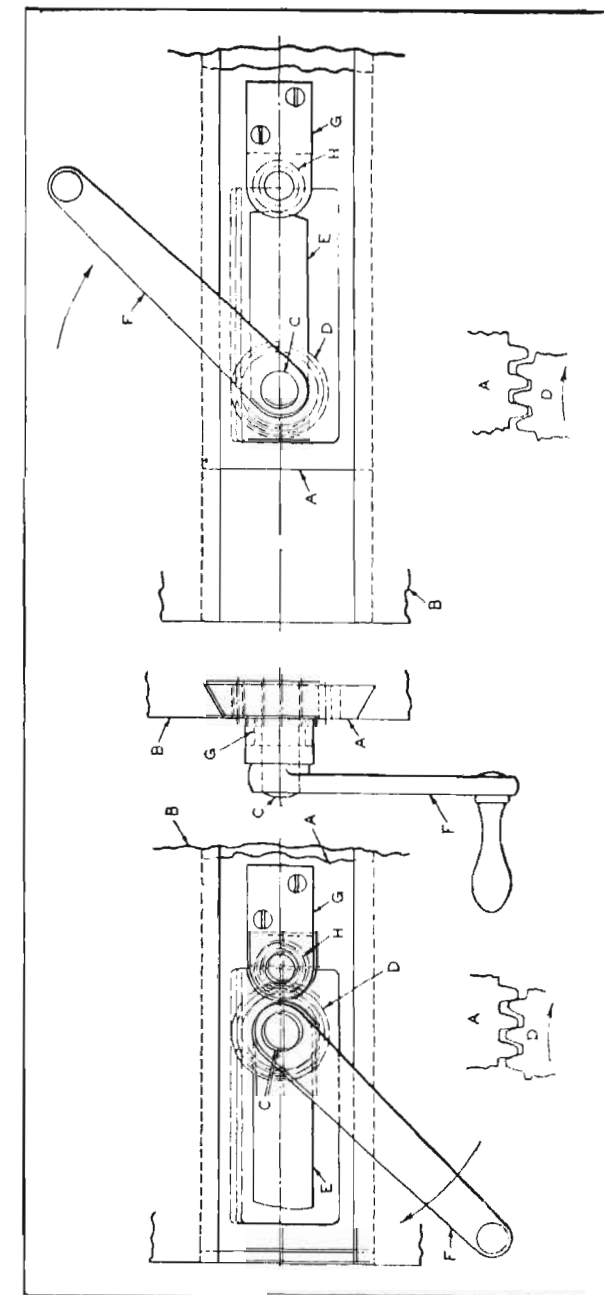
(Left) Rack-and-pinion Mechanism with Rack Member A Withdrawn from Clamping Position; (Center) End View of Mechanism; (Right) Member A Locked in Clamping Position by Bar E.
